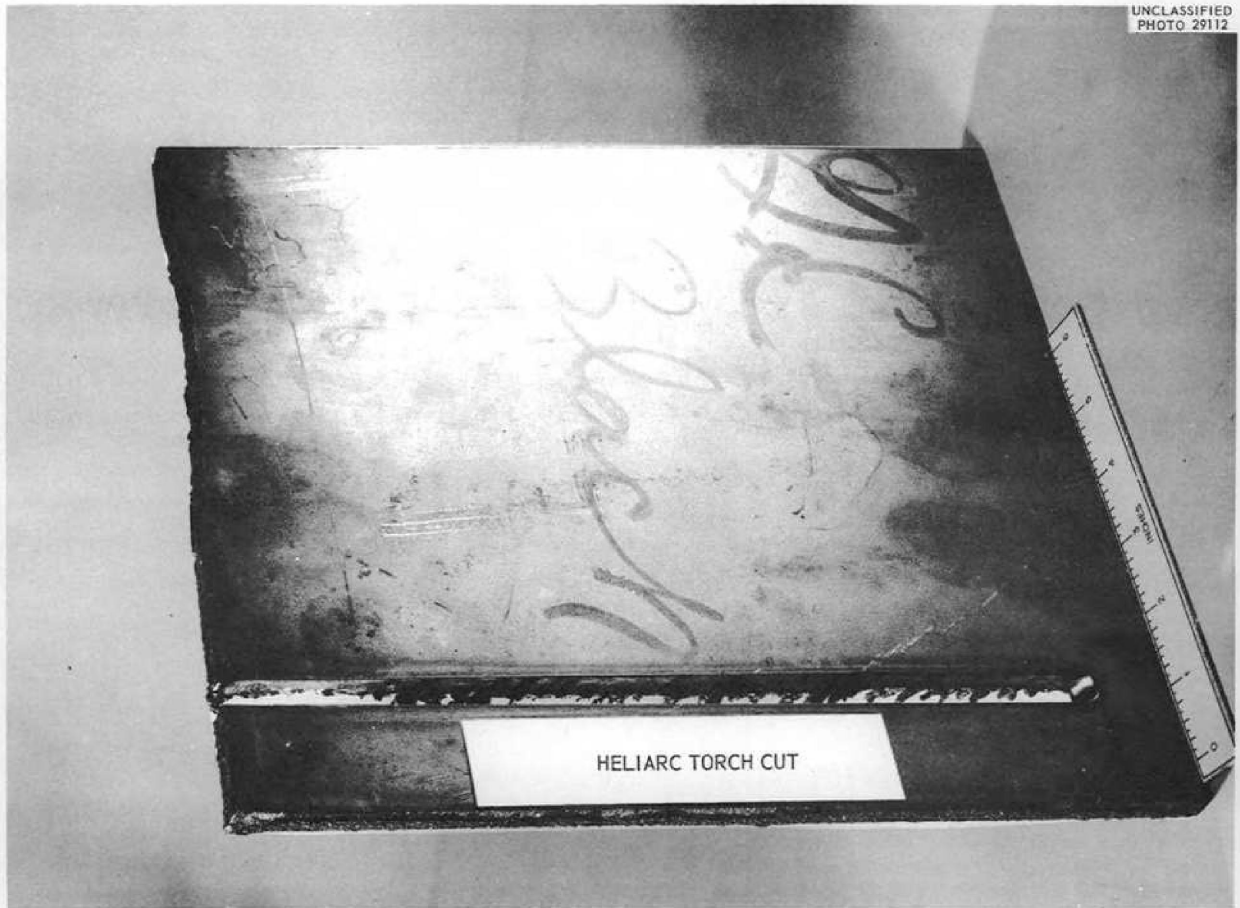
Inconel Plate Cut by Heliarc Torch.
